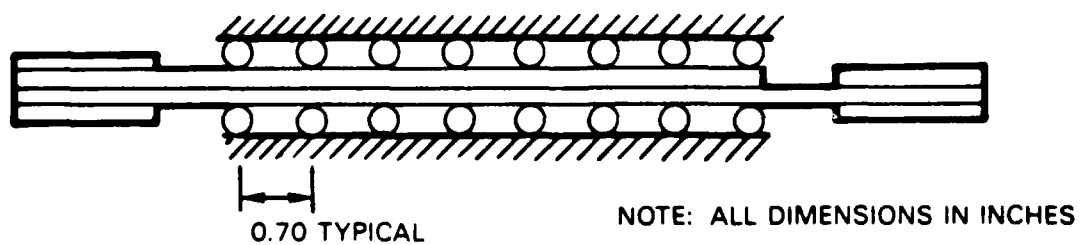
Constrained Cracked-Lap Shear Specimen
